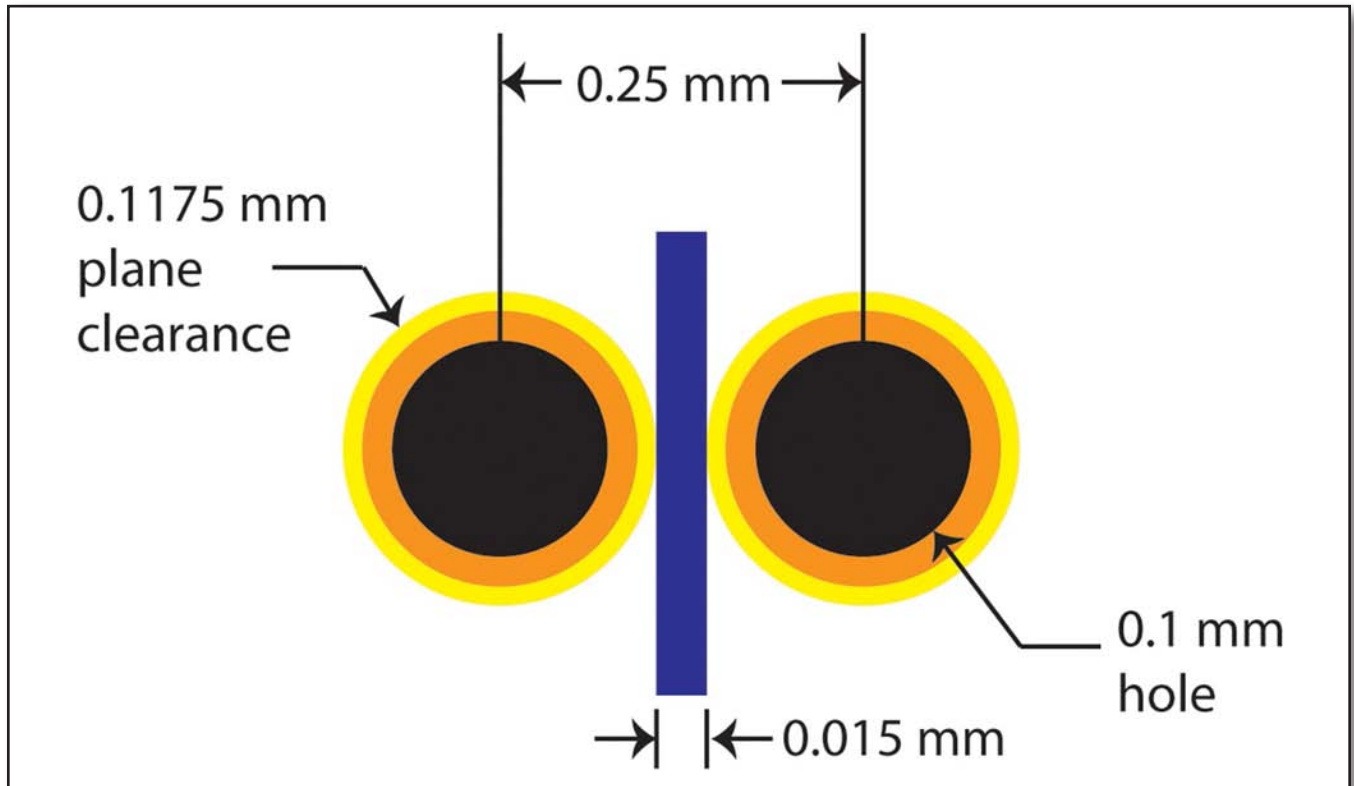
Trace routing width through a 0.25 mm BGA pitch.
